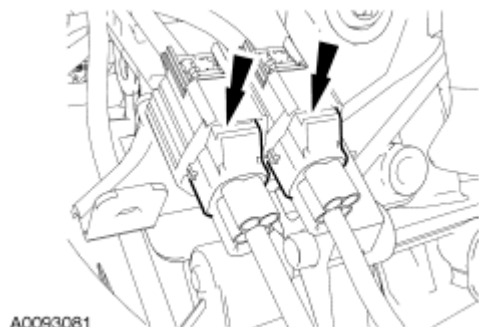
Locating Electrical Connectors And Wiring Retainers
